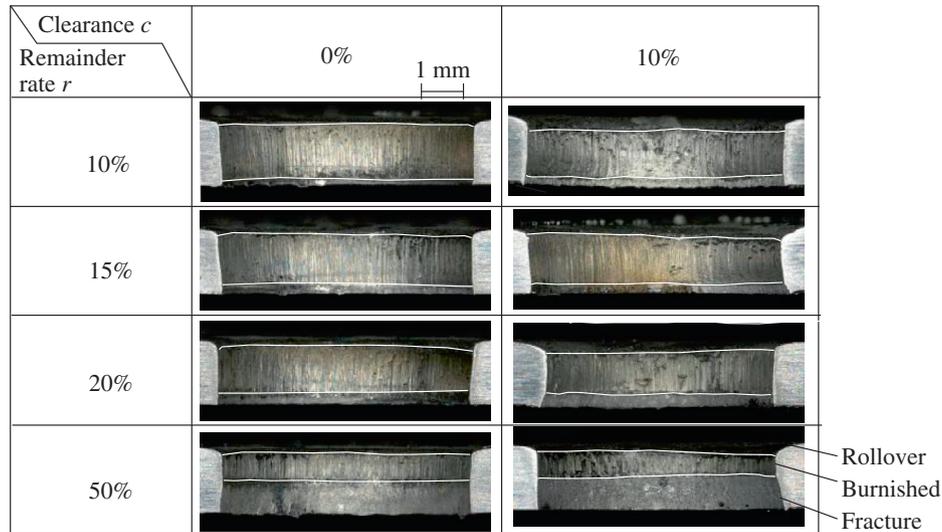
Cross-sections and surfaces of holes after cold scrap removing.
